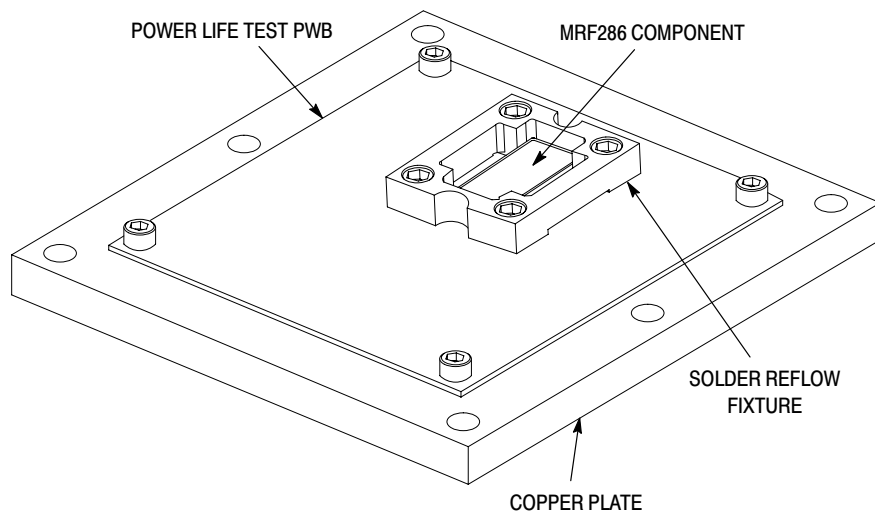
MRF286 Component Assembled with Solder Reflow Fixture
